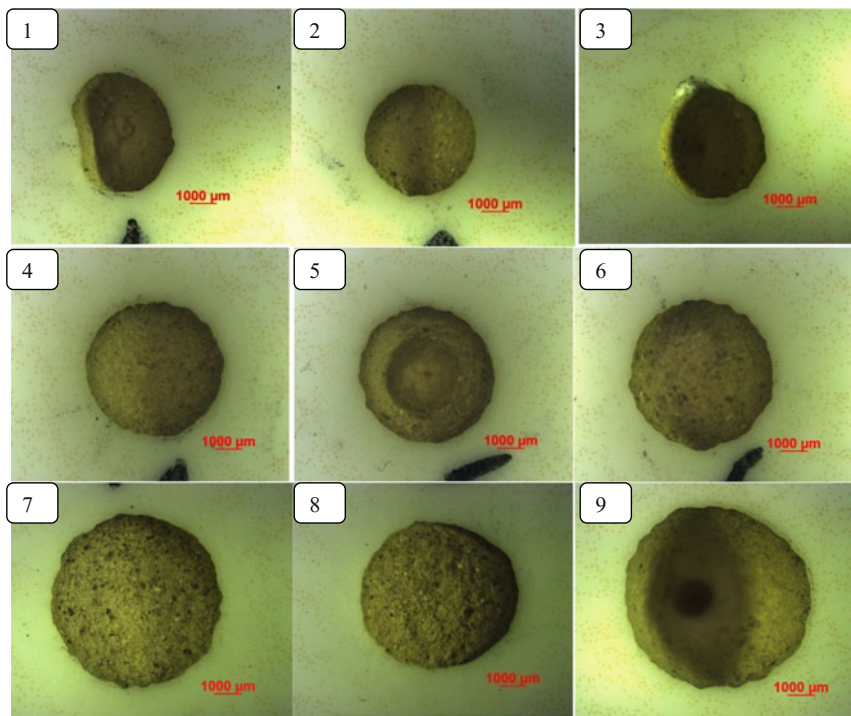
Microscopic views of the machined hole using sand on tiles
